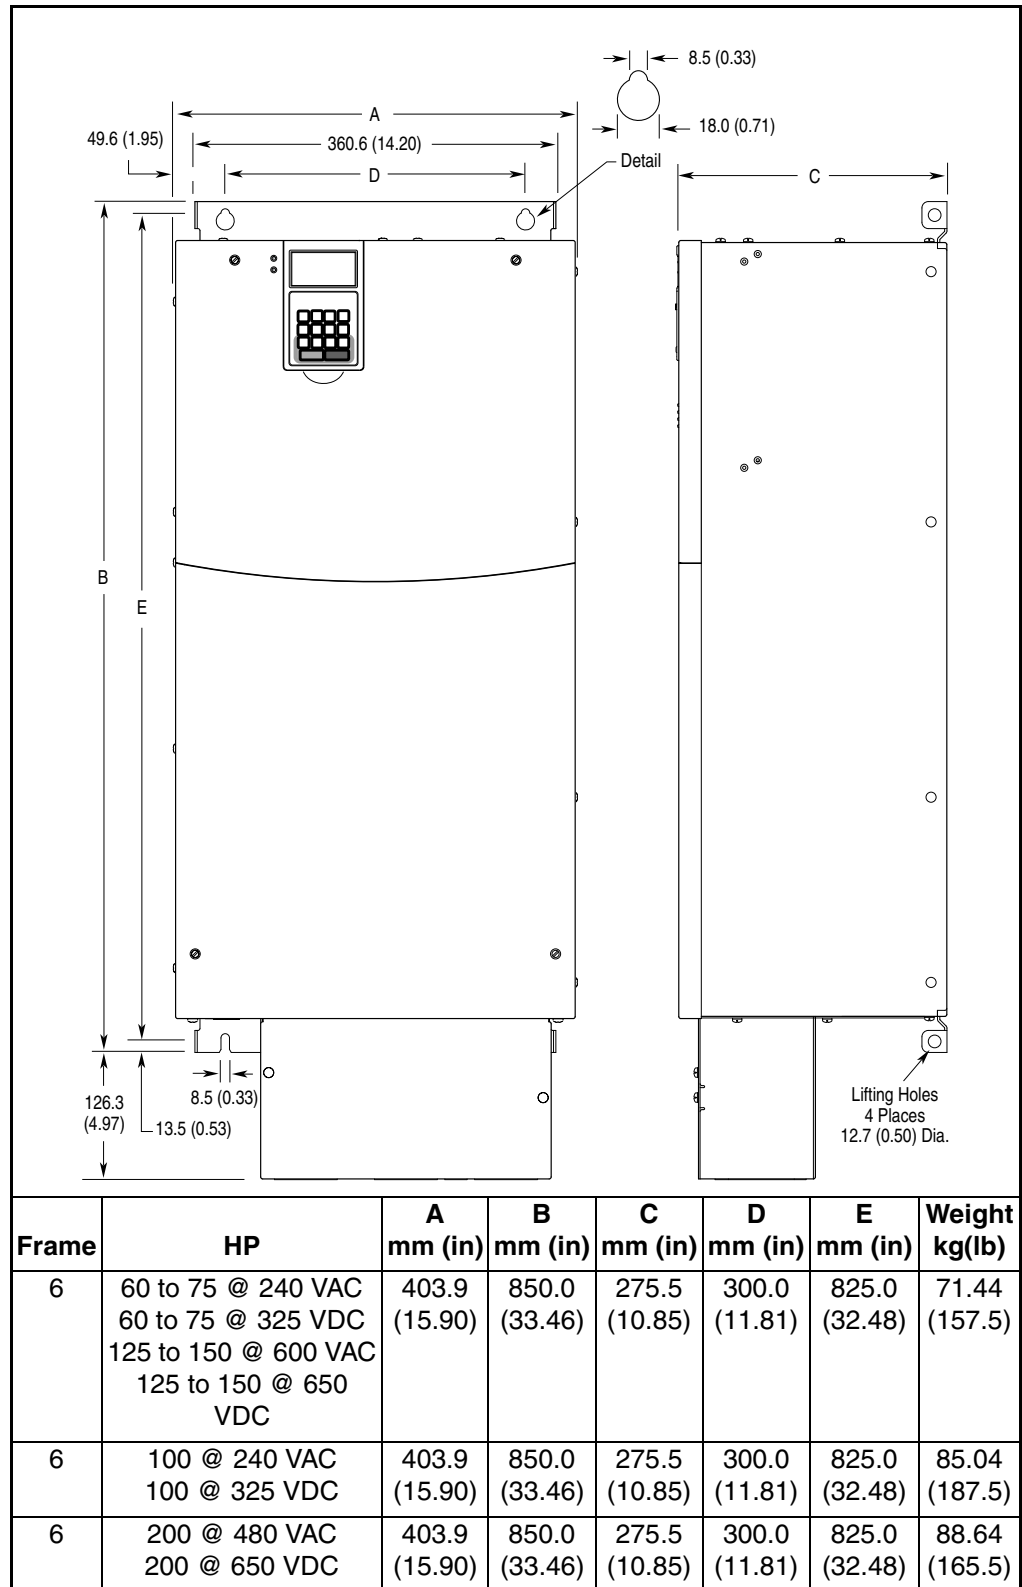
GV6000 Drive Dimensions Frame 6
